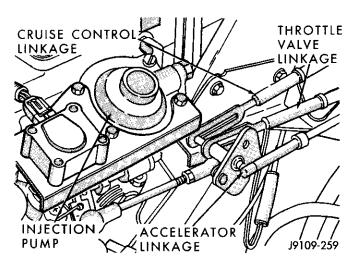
Accelerator/Speed Control/Throttle Valve Linkage
